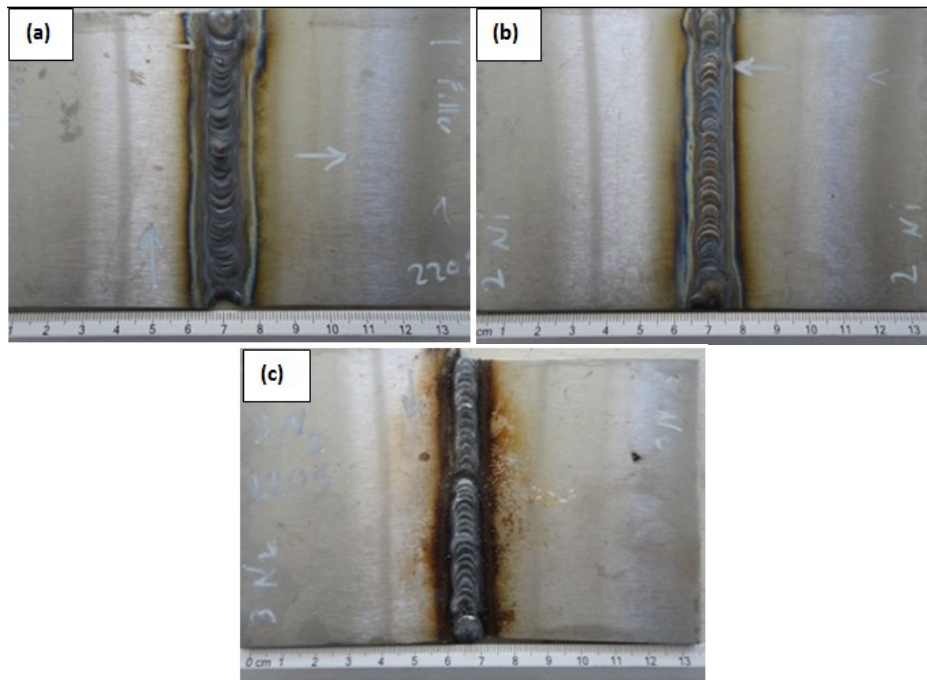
The weld face of the samples using (a) F (b) FNi (c) FN2
